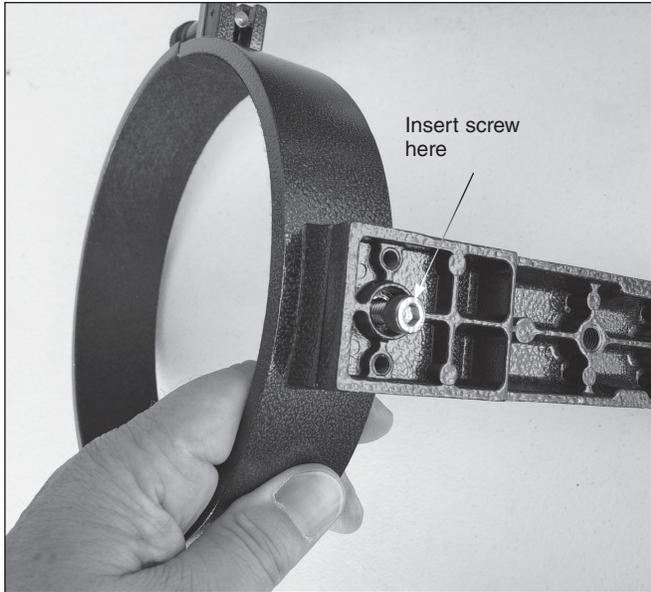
Attaching the dovetail mounting bar to the tube rings.
